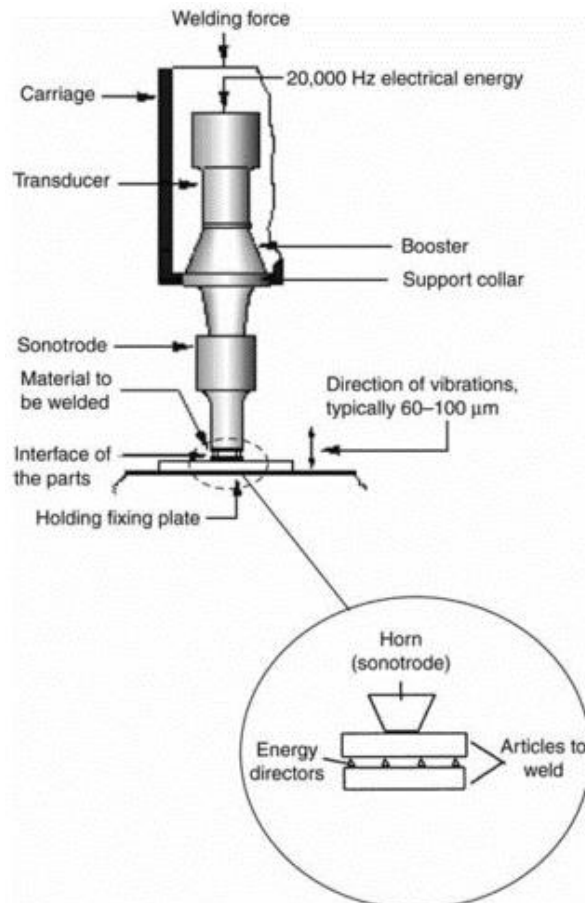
Schematic of ultrasonic welding [37]
